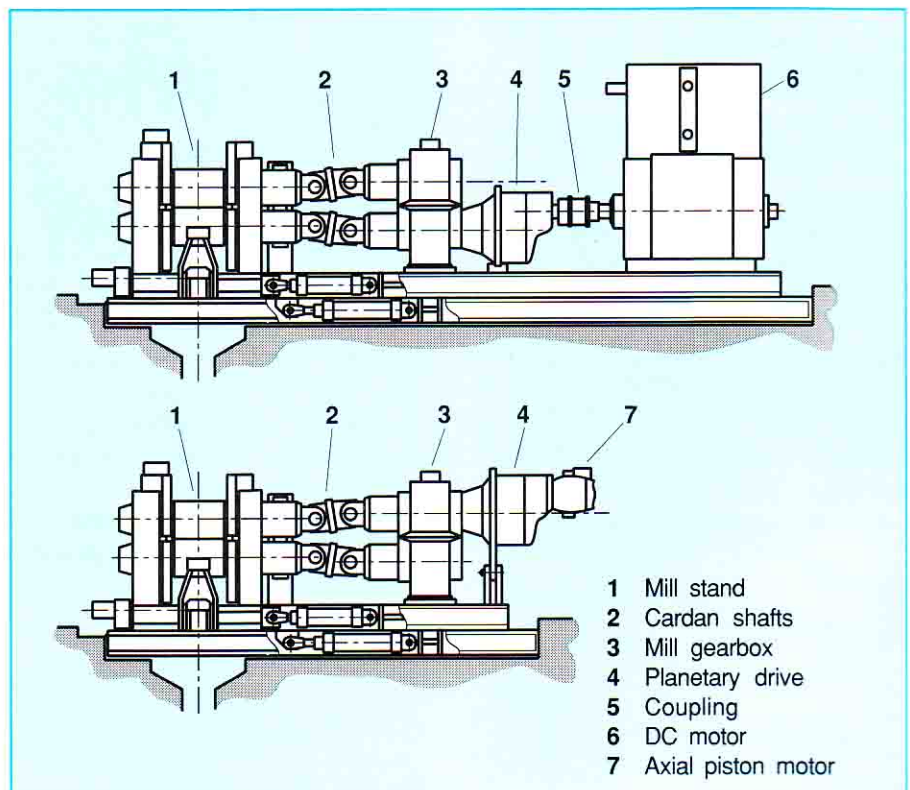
Roughing mill stand with electrical drive (top) and hydraulic drive (bottom).
